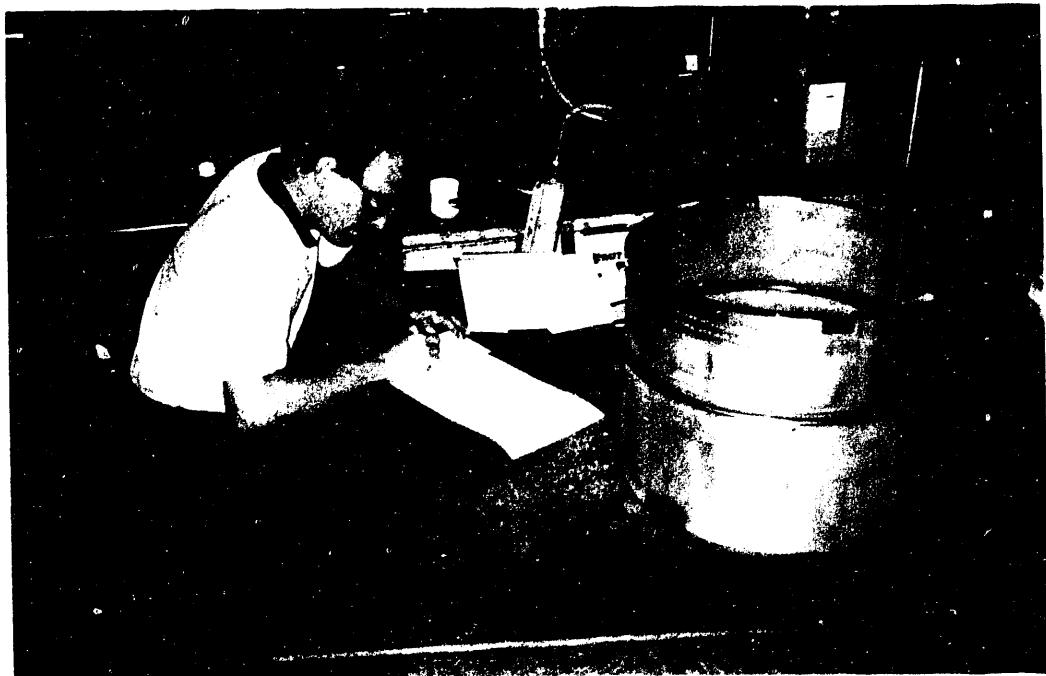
B. Marking of Strip Chart After. Note Completed Weld in Foreground.
